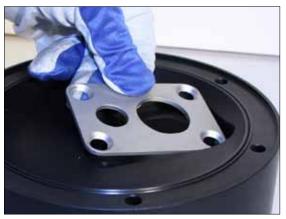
Put on the air valve plate (271) on one side of the centerblock (122) and mount with the screws (2711). Push the air valve from the other side as described in fig 6.2.
